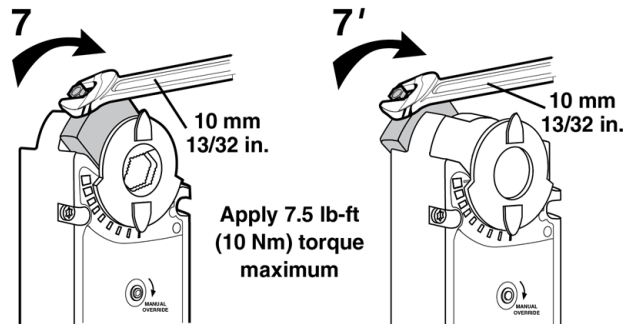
Fasten the Shaft Adapter to the Damper Shaft.
